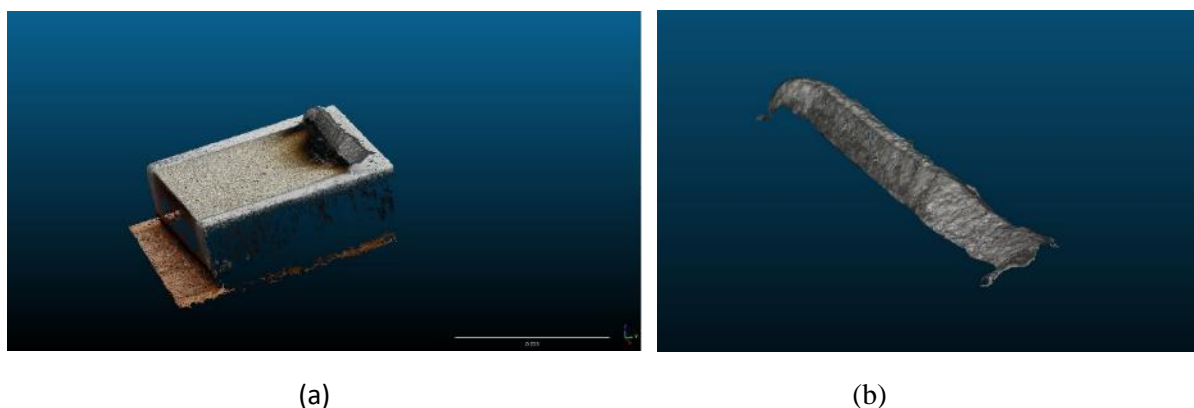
A typical example of (a) a Cut piece of a 3D model of the specimen and (b) a Fracture surface area of the weld.
